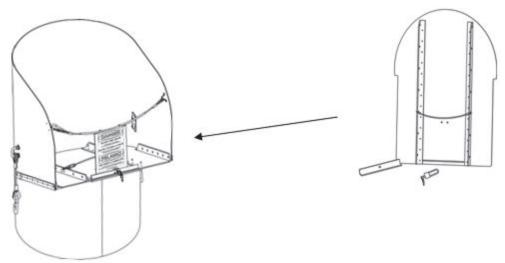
Lockout cover for Top Hopper section (2 piece design).
